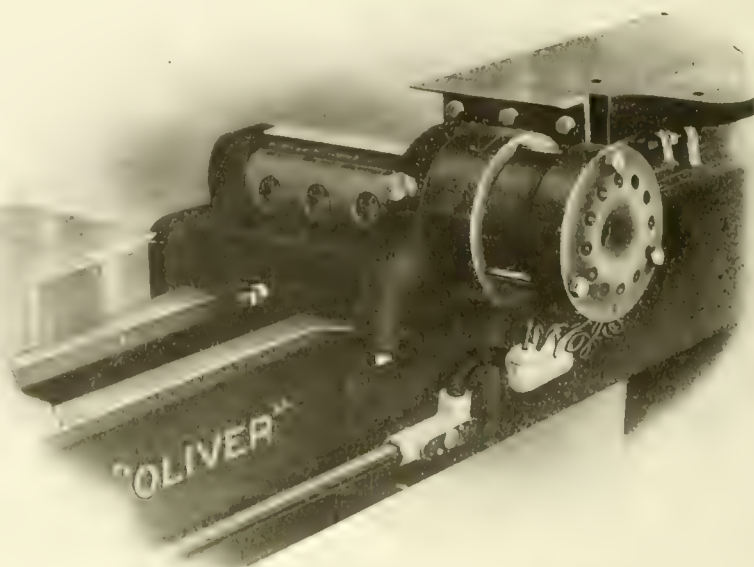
CLOSE UP VIEW OF MOTOR AND CUTTER.
